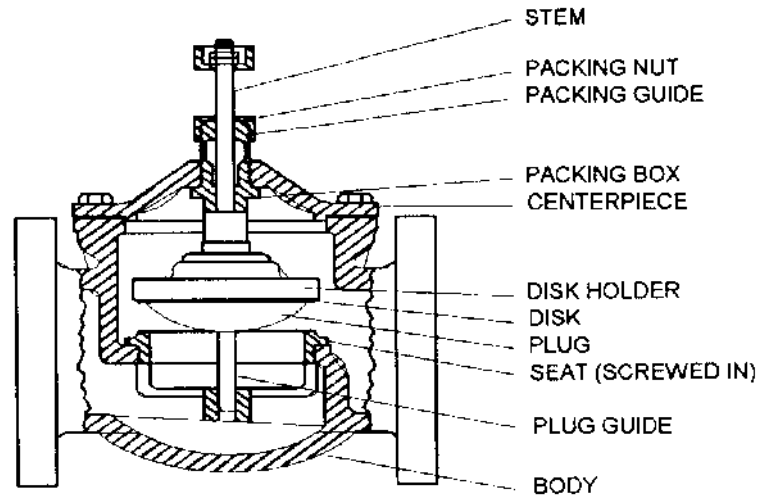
N.O. Cast Iron Flanged Style Valve Body
